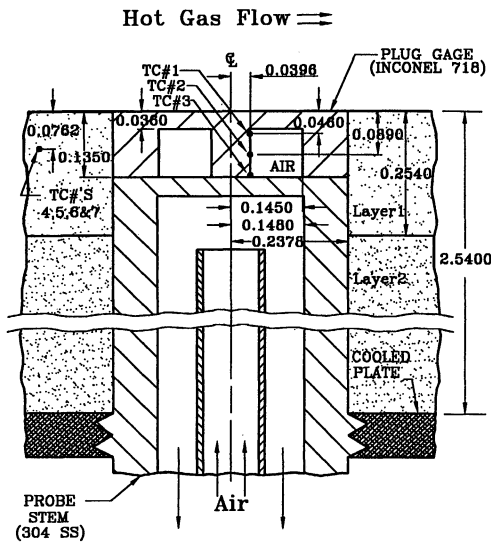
Cross-sectional view of the gauge/probe assembly as mounted in the experiment. (All dimensions in centimeters.)
